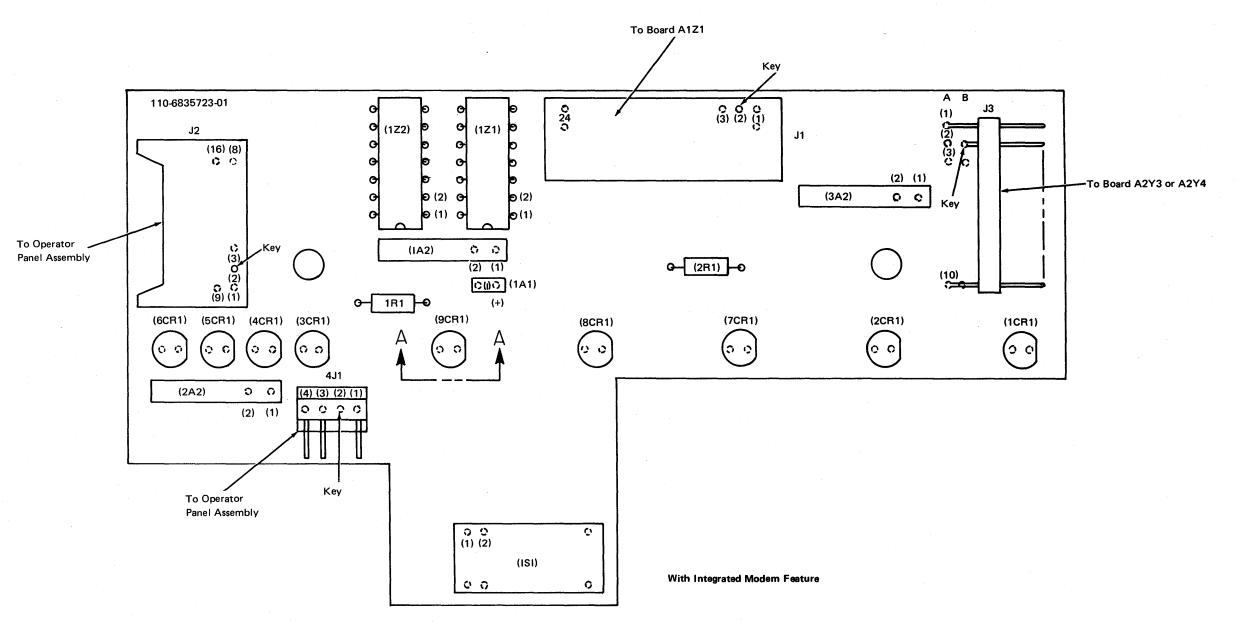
(Part 2 of 2). Operator Panel Indicator Card
